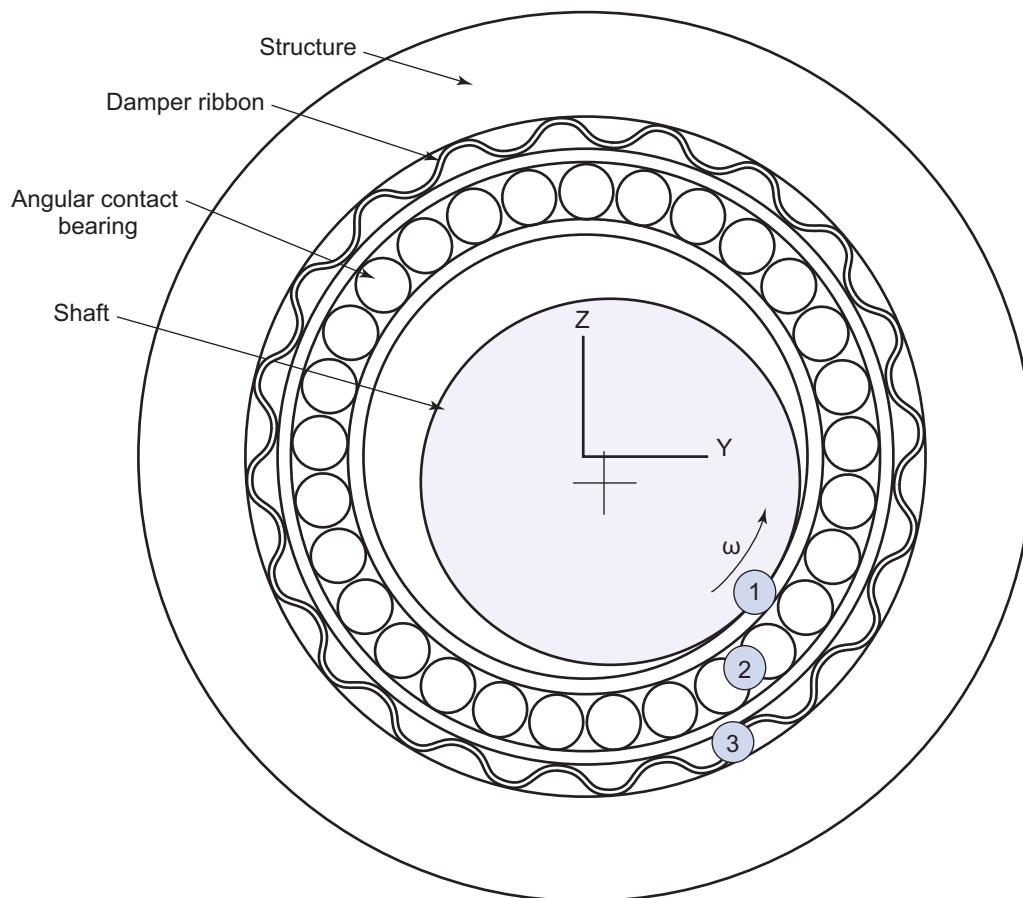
Typical Auxiliary Bearing Mount System [4]
